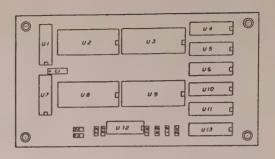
OPTION 35 BCD PC ASSEMBLY #05770101 Rev A
